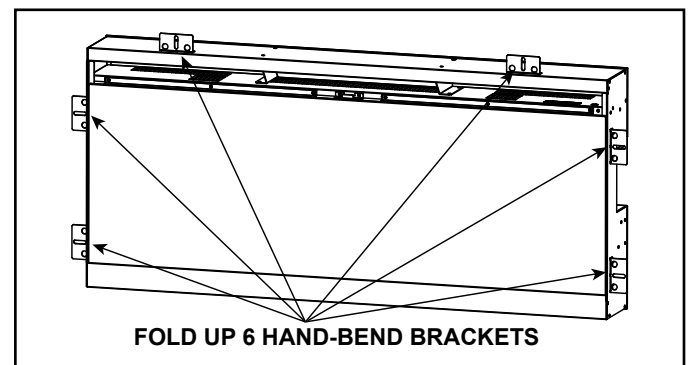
Hand-Bend Brackets for Recessed Wall Installation
